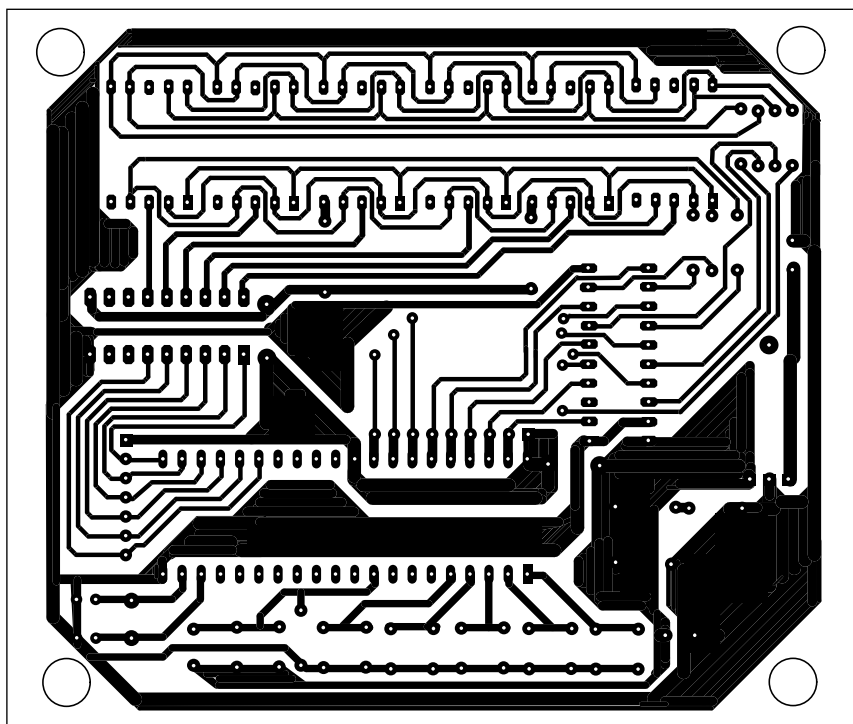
Actual-size, single-side PCB for the real-time clock using AT89S8252 microcontroller
